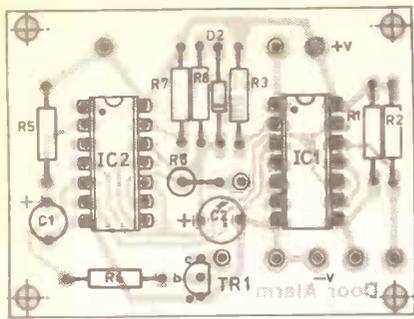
Component layout and full size printed board copper foil master pattern for the Door Sentinel.
